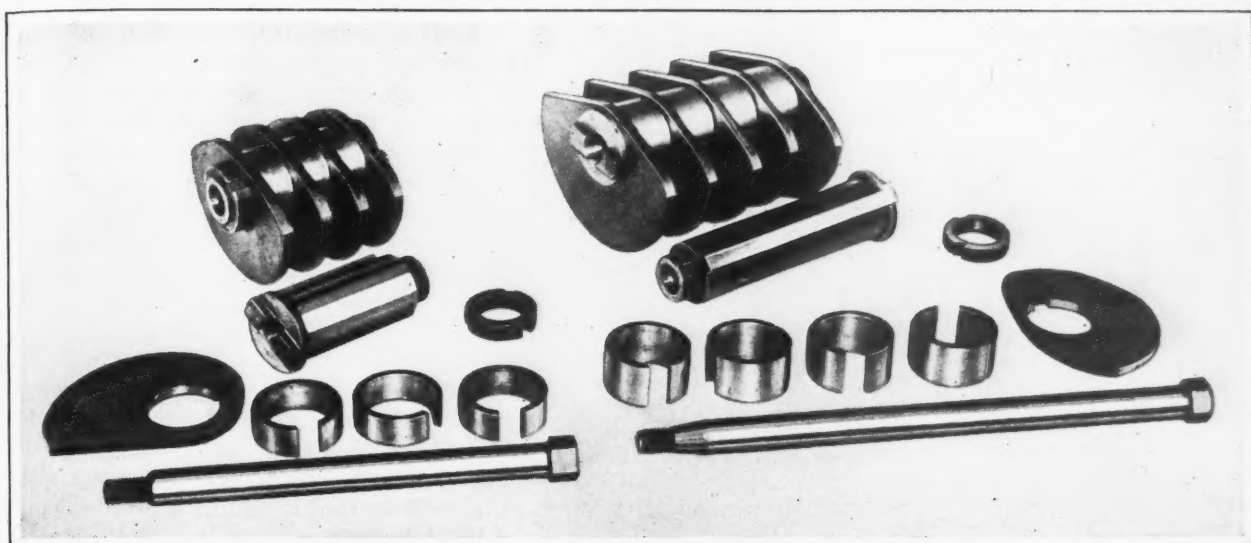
Illustration Showing how the Cams that Control the Operation of the Cross-slides and Tool-spindles are Assembled into Units
